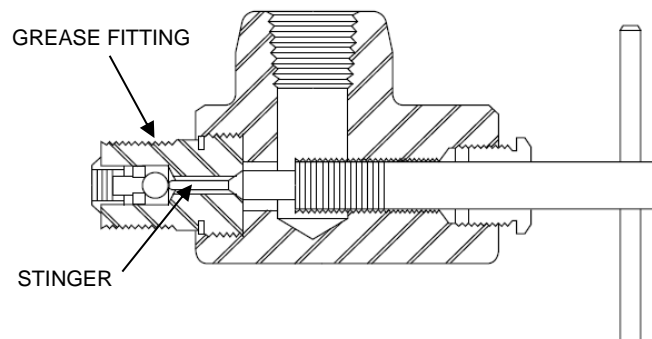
Pressure Releasing Tool with Stinger Screwed In (Ball Check Open and Venting).
